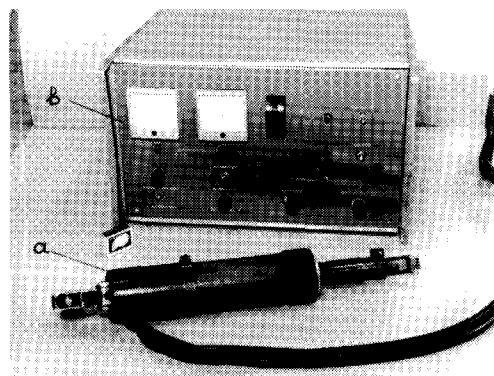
Equipment for ultrasonic treatment of welded joints: a) hand tool; b) thyristor-generator unit
